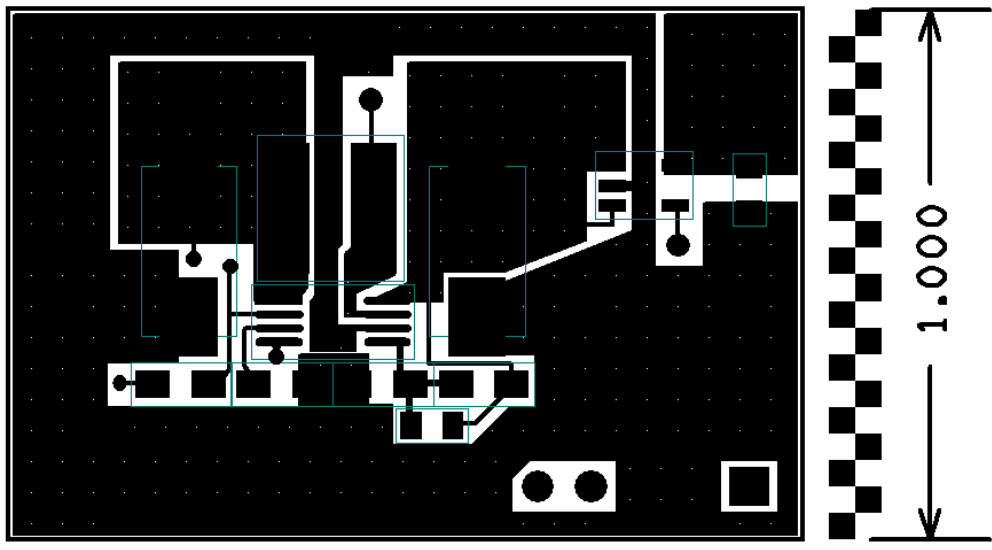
SP6644/6645UEB PC LAYOUT TOP SIDE
